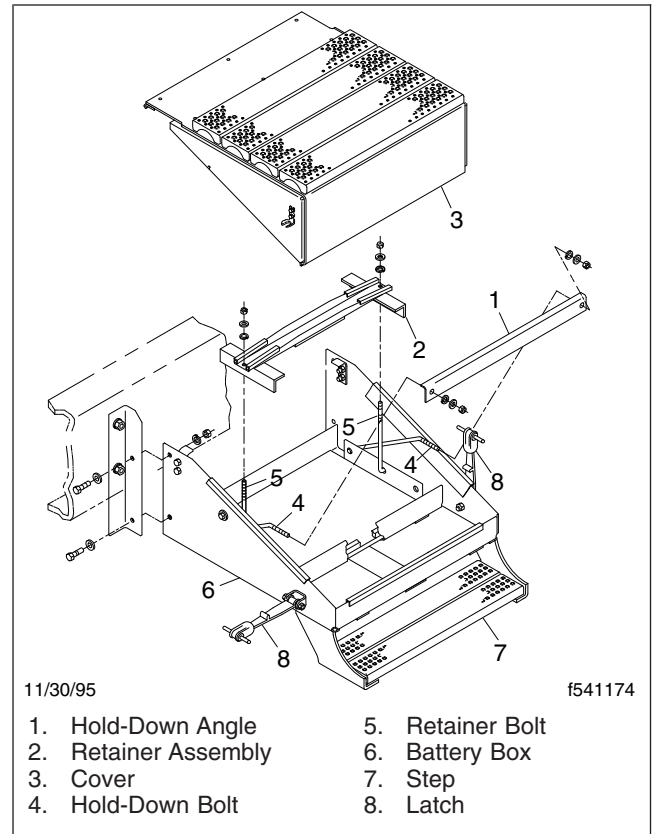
, Side-Rail Battery Box, Long Side to Rail, with Step and Diamond Plate Side Cover
